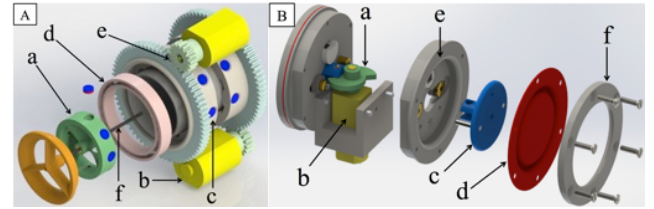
For sake of clarity, the images propose a partially exploded view of the systems. Fig. 8A shows the bow thruster assembly and exploded components. Fig. 8B shows the buoyancy assembly and exploded components.
